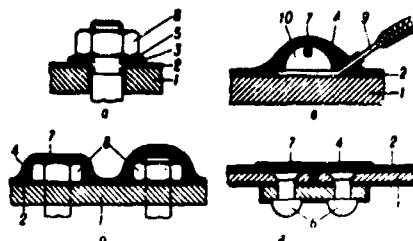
Protection of magnesium alloy details from contact corrosion: a) Use of insulating gaskets; b, c, d) use of special protective covers; 1) Magnesium alloy detail; 2) paint-type coating; 3) layer of rubber cement 88; 4) layer of cement or P-5 primer; 5) gasket washer; 6) rivet; 7) final enamel coat layer; 8) bolt, nut; 9) grounding terminal; 10) grounding attachment screw
